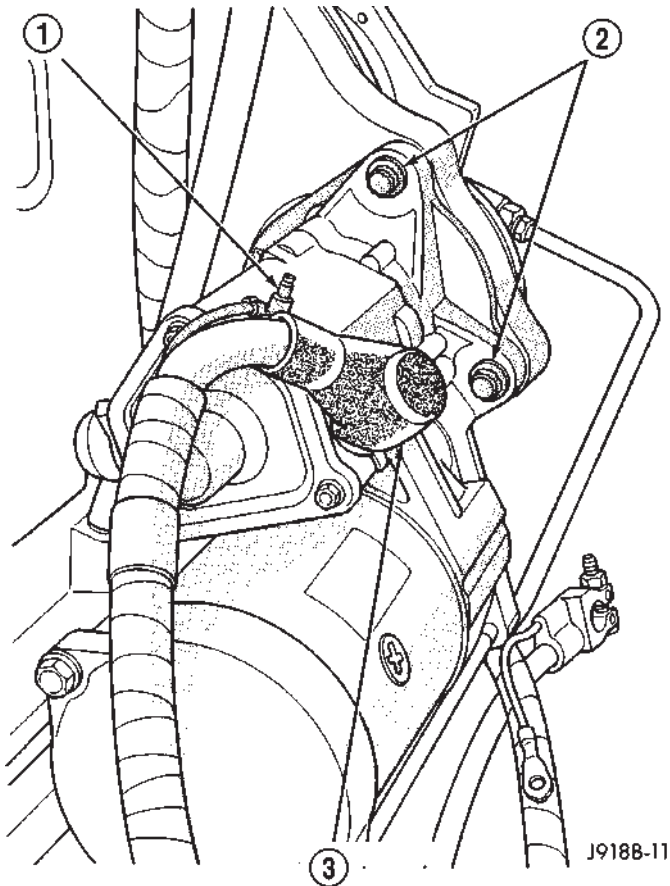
Starter Motor Wire Harness Remove/Install - 5.9L Diesel Engine
